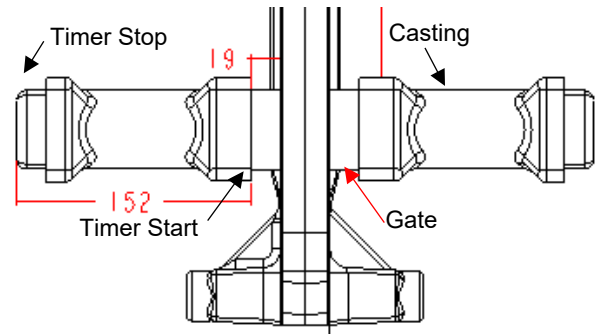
Horizontal casting orientation with EPLA pattern (left) and EPS (right). The castings are side filled. Dimensions in red (mm).
